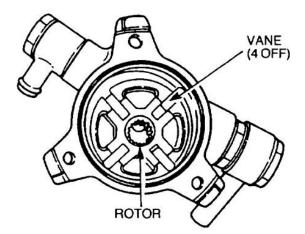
Installation of the Vacuum Pump Rotor and Vanes
